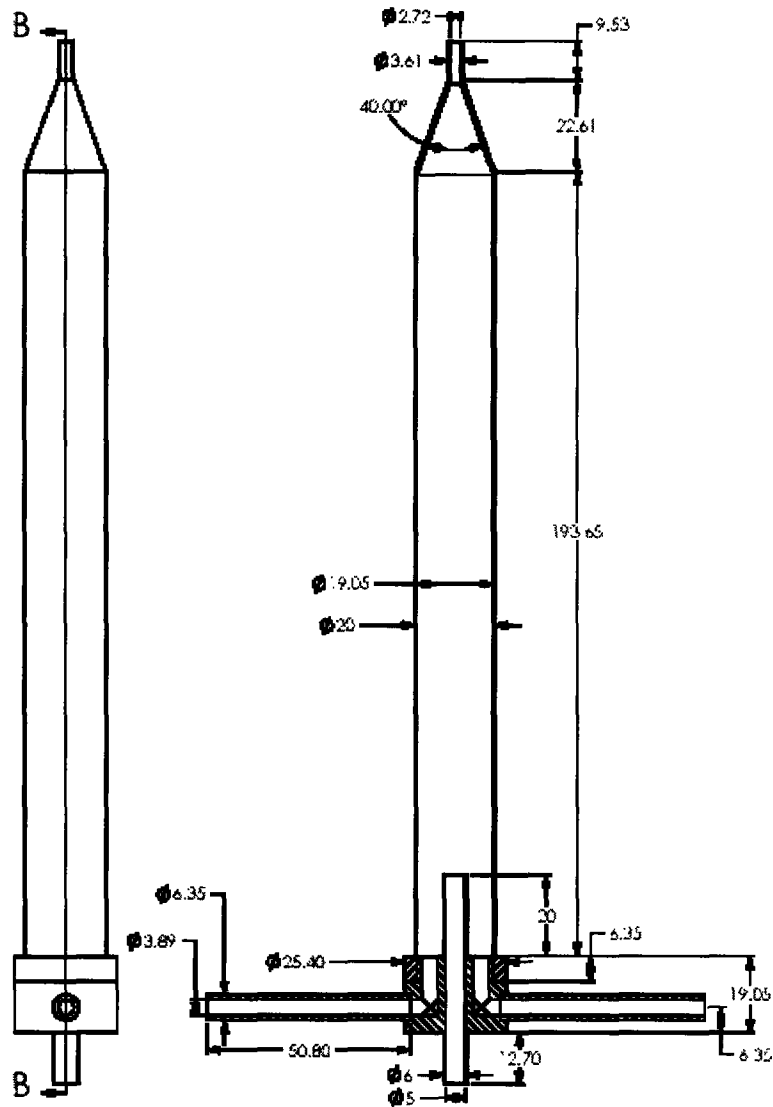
Technical schematic of the aluminum column used with the magnet assembly, shown at two different side views, each at 90 degrees to one another. The units are in millimeters.
